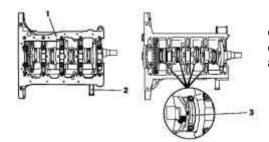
Removing the connecting rod: 1 - the base of the cylinder block, 2 - a special tool, and 3 - connecting rod bearing caps
